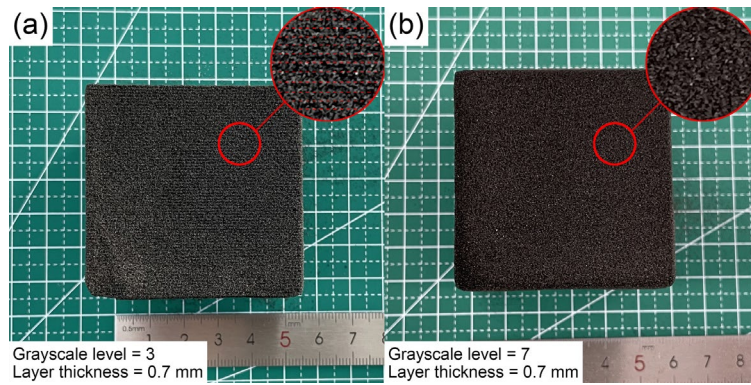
Surface appearance of printed sand mold samples at low (a) and high (b) binder content
